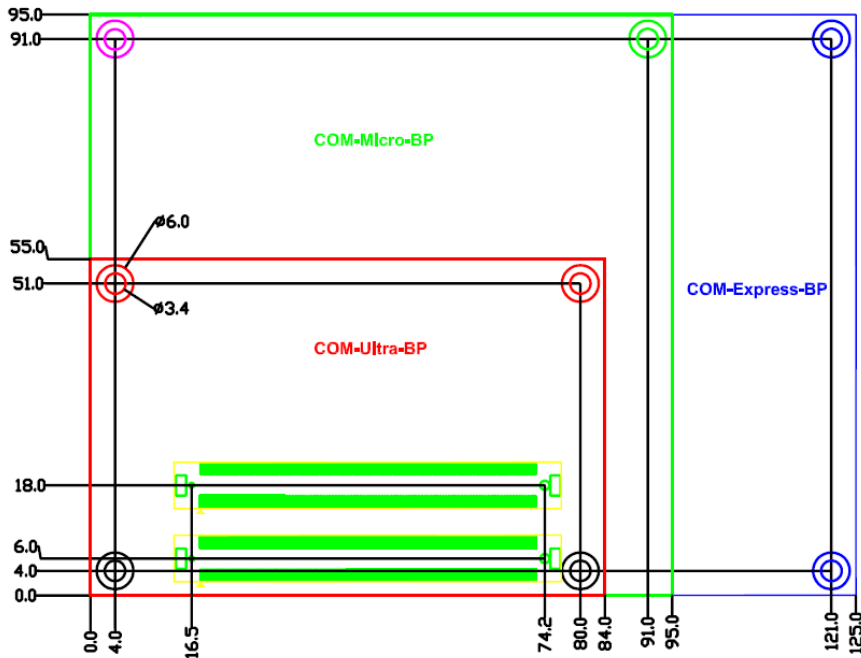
COM-Express Module Board Mechanical Dimensions
